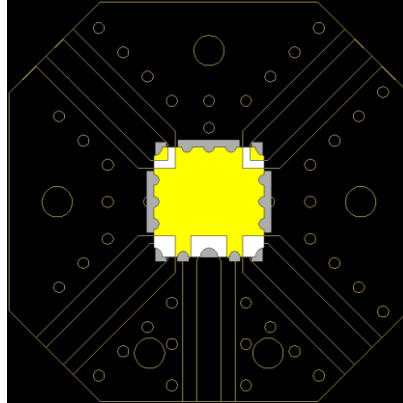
Placing the RQF1600Q06 on the 14 points of the PCB Surface
